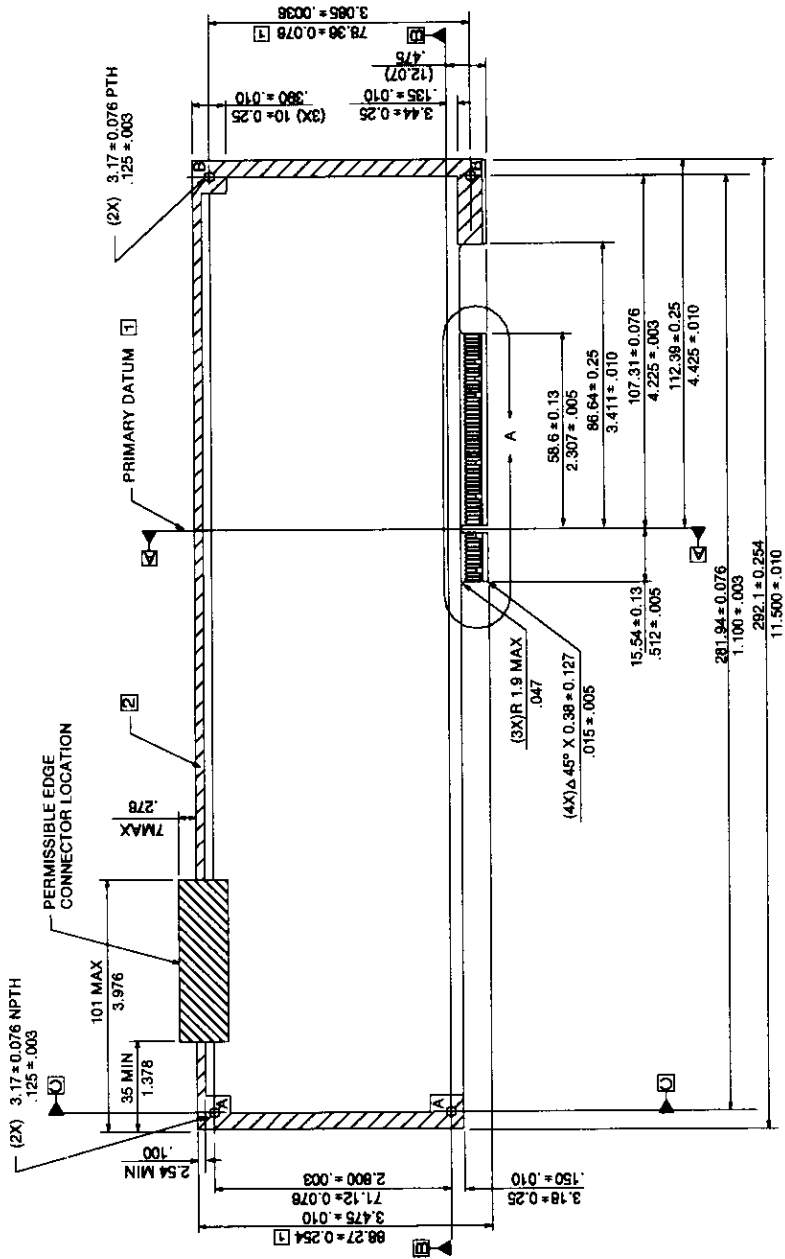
Adapter Dimensions (8- or 16-Bit)
